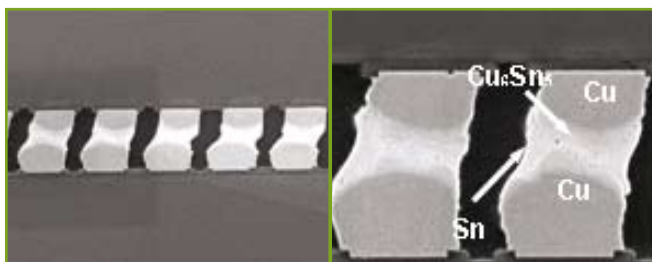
Cross-section of micro joints with Cu/Sn solder micro bump joined to Cu/Sn solder micro bump.
